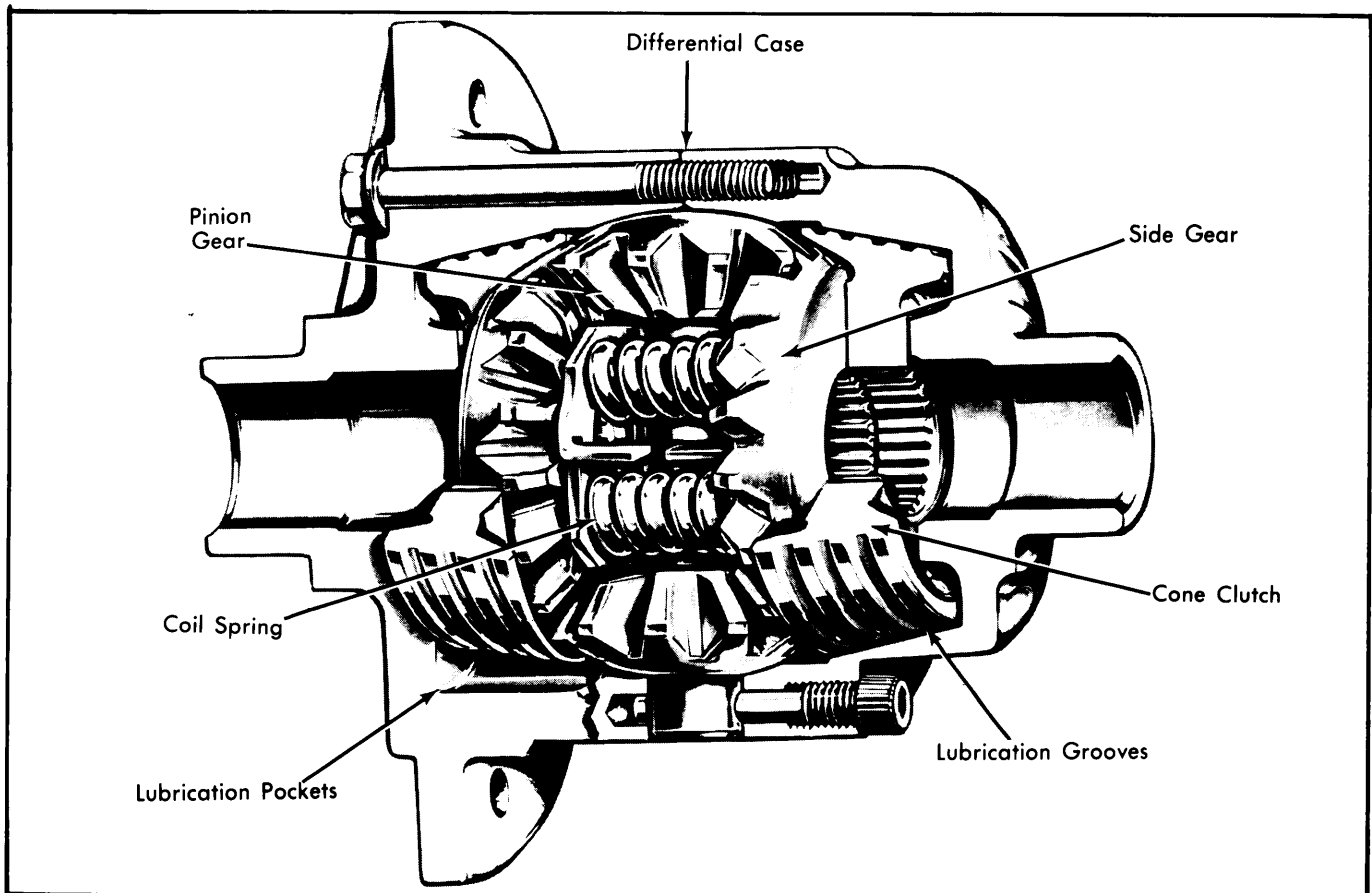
Cutaway View of Chrysler Corp. Sure-Grip Differential Assembly
